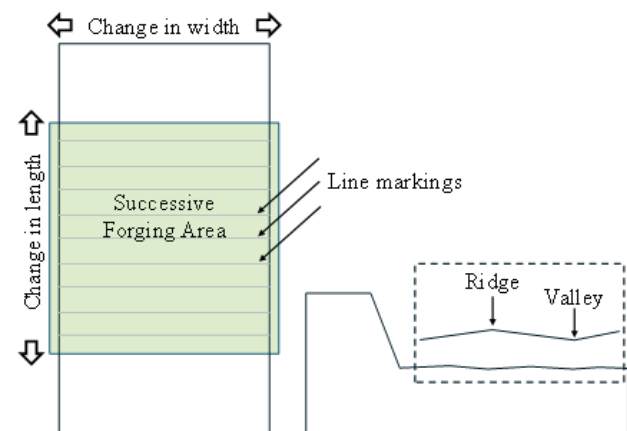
Geometrical changes at JSC1180YN UHSS sheet after successive forging
